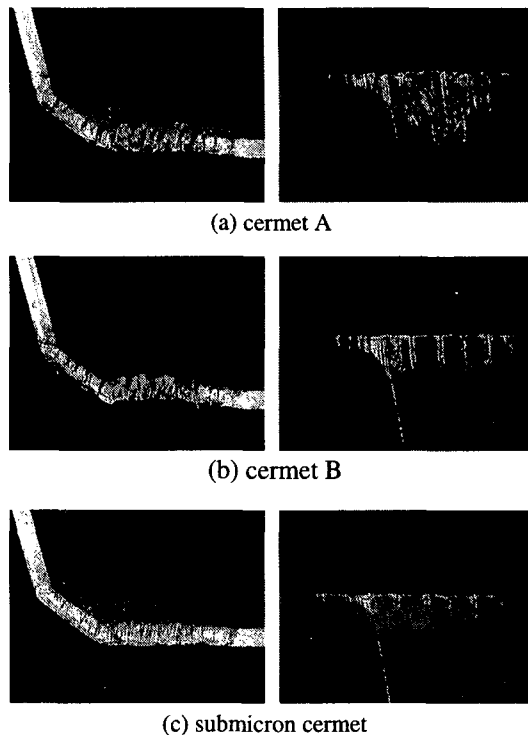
Photographs of various cermet tools after 7200m machining in the milling of SCM4
